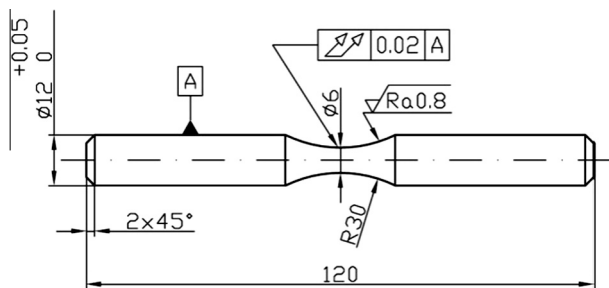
Geometry of the specimens; all dimensions are in mm.
